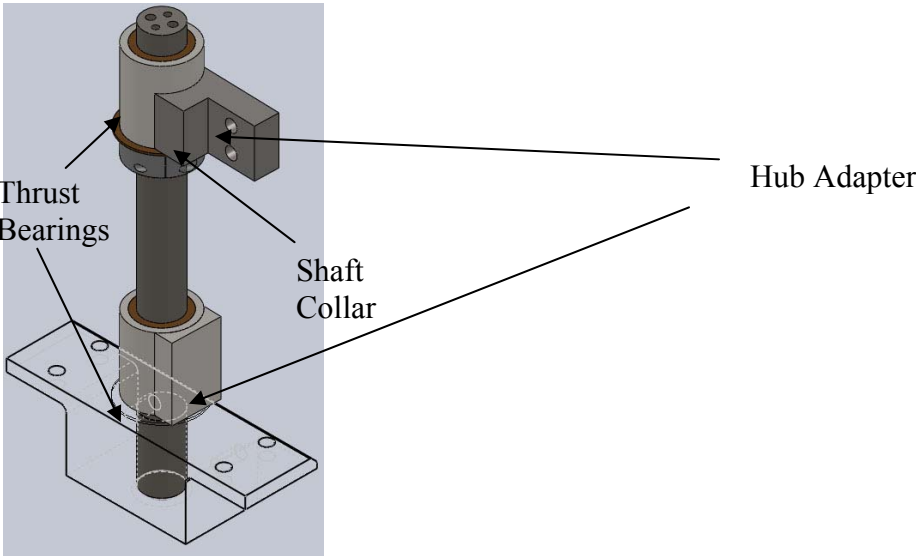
Showing the Disconnect Coupling, Shaft Collar, and Thrust Bearings
